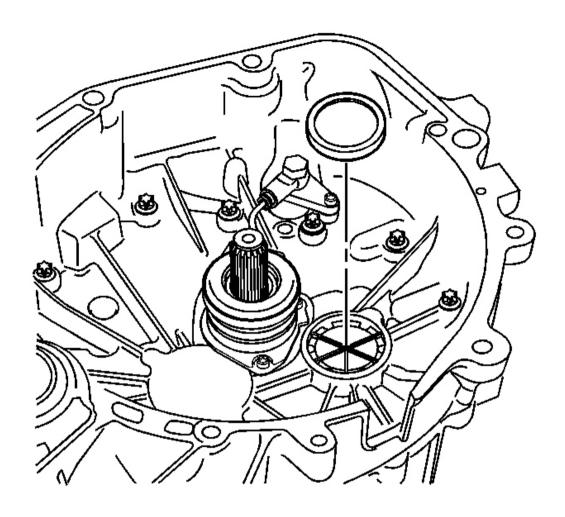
Identifying Intermediate Shaft Seal Courtesy of GENERAL MOTORS CORP.
